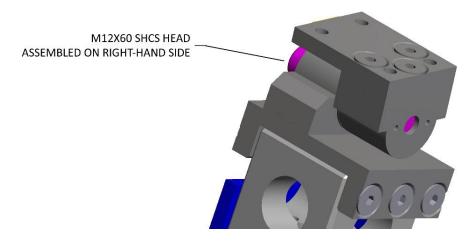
M12 x 60 SHCS Assembly on Right-Hand Side
